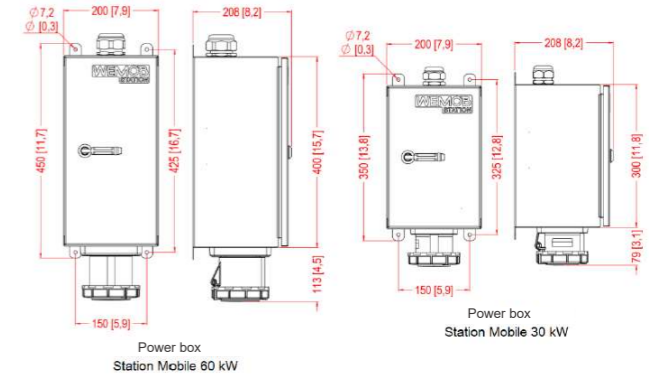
Power box dimensions in millimeters [mm] and inches [\"/>
